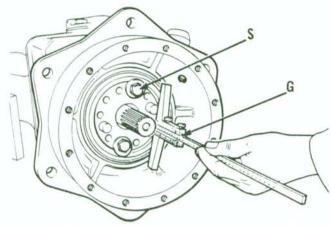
Measure standout of inner bearing race as shown when selecting shims (19—Fig. 16). Refer to text.
